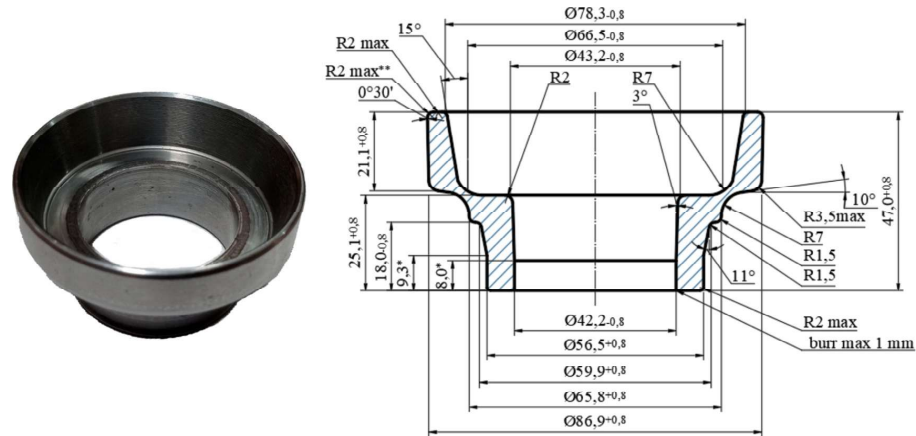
The prototype and design of the blank set of rings on a roller bearing 7509.
